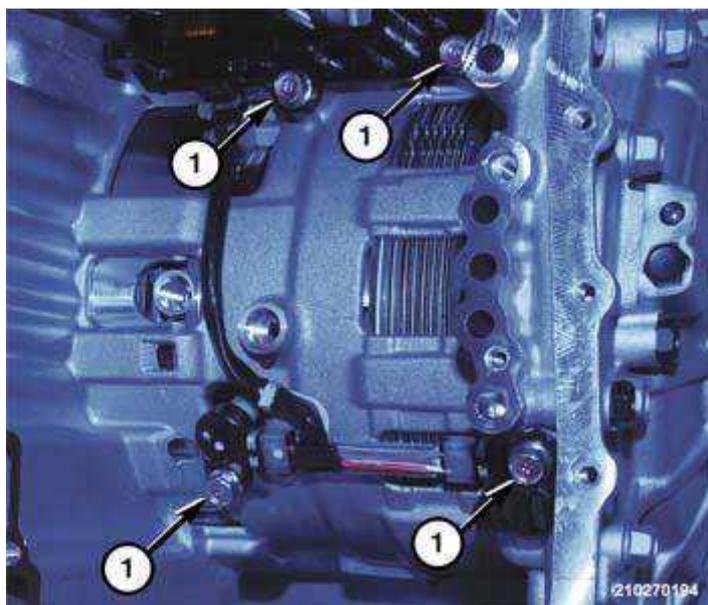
Speed Sensors, Main Wire Harness & Bolts
